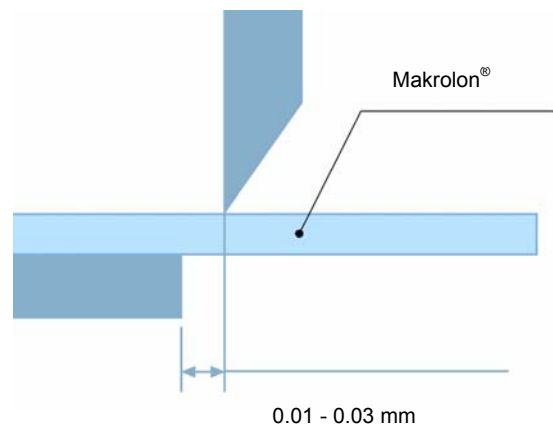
Clean cut edges - clearance between blade and supporting surface: 0.001 - 0.03 mm
